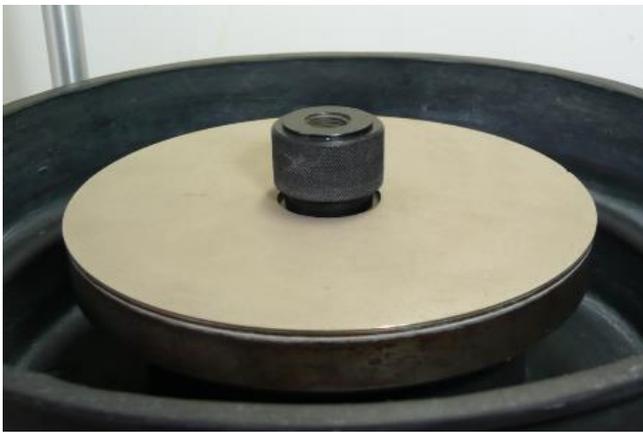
Sintered 600 mesh diamond lap, showing the diamond/bronze layer on the steel backing
